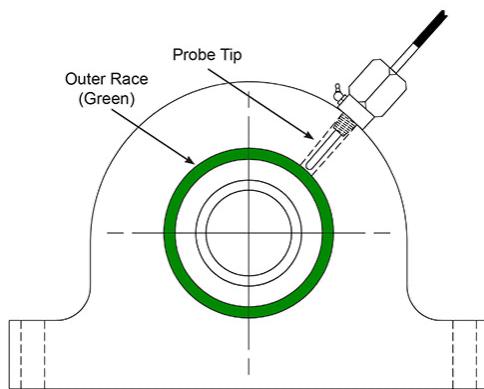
Bearing housing mounting (www.go4b.co.uk)
